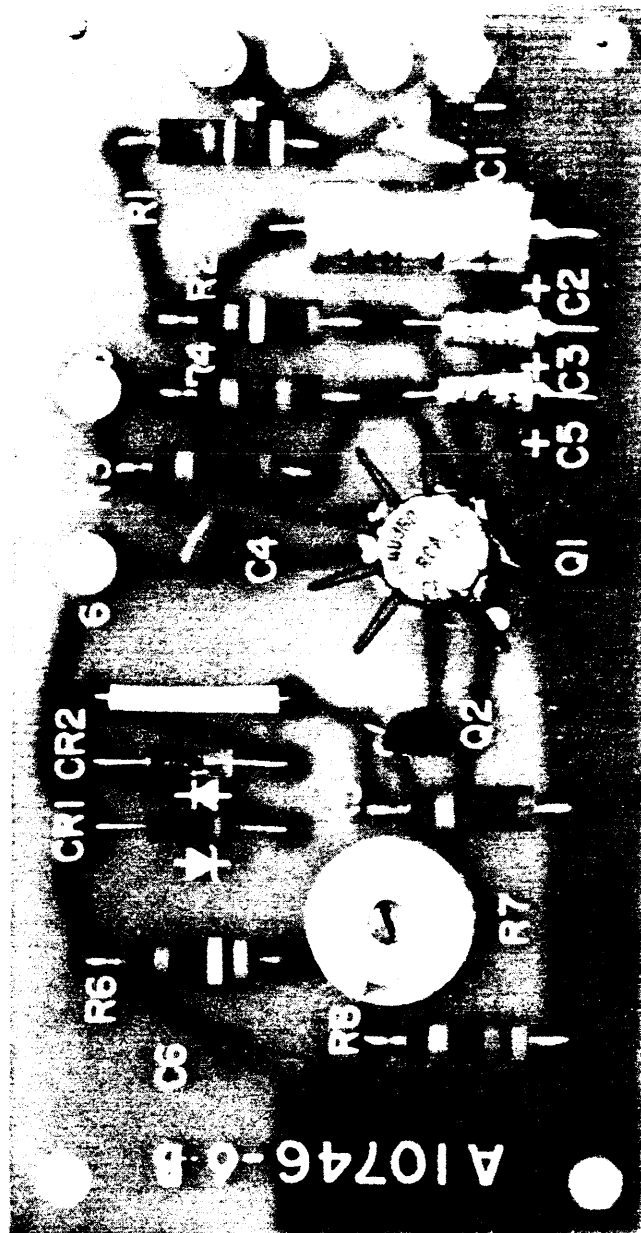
Power Supply (Regulator) Assembly 1A1
